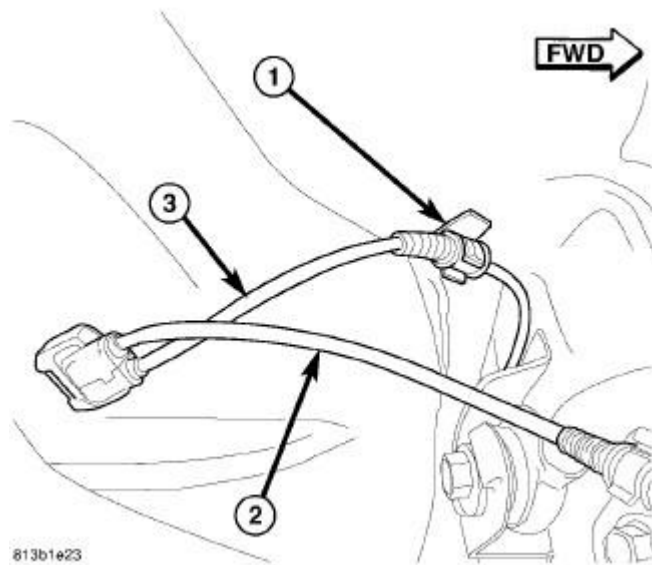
LEFT/RIGHT REAR WHEEL SPEED SENSOR ROUTING
